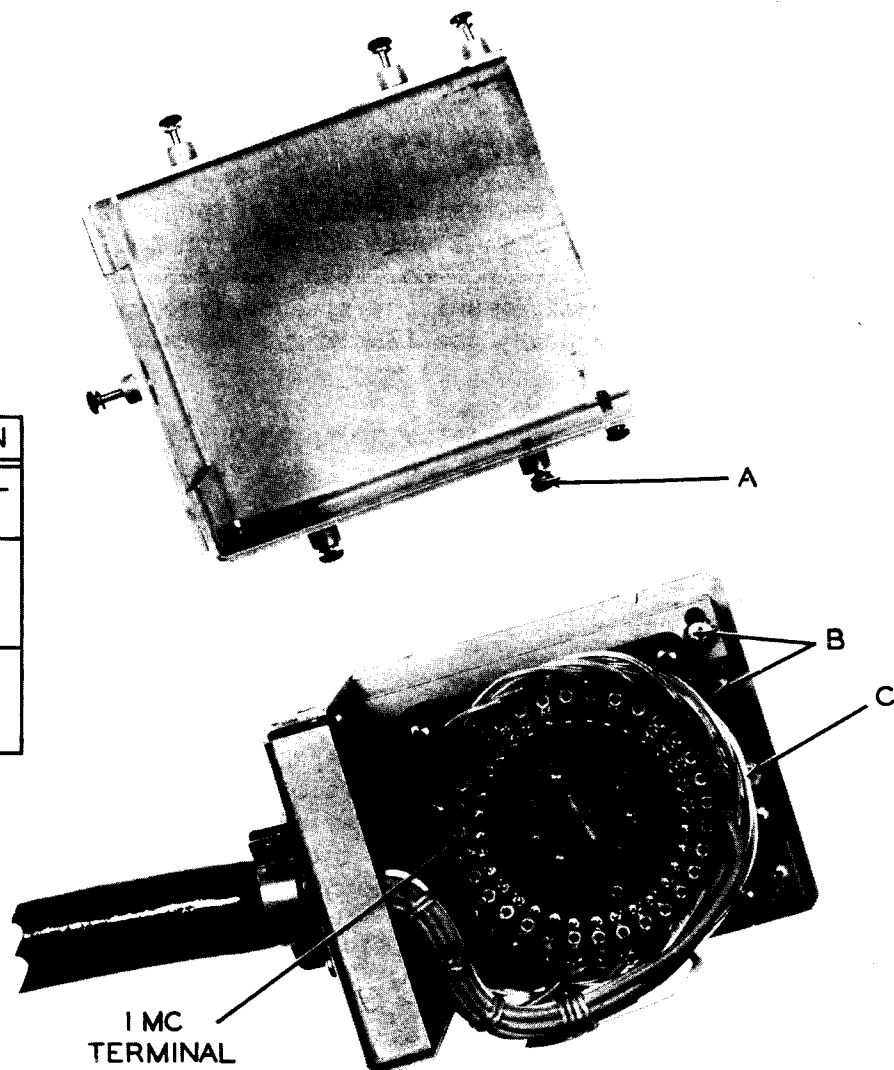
Band switch adapter of Electrical Special Purpose Cable Assembly CX-1619/U, cover removed.
